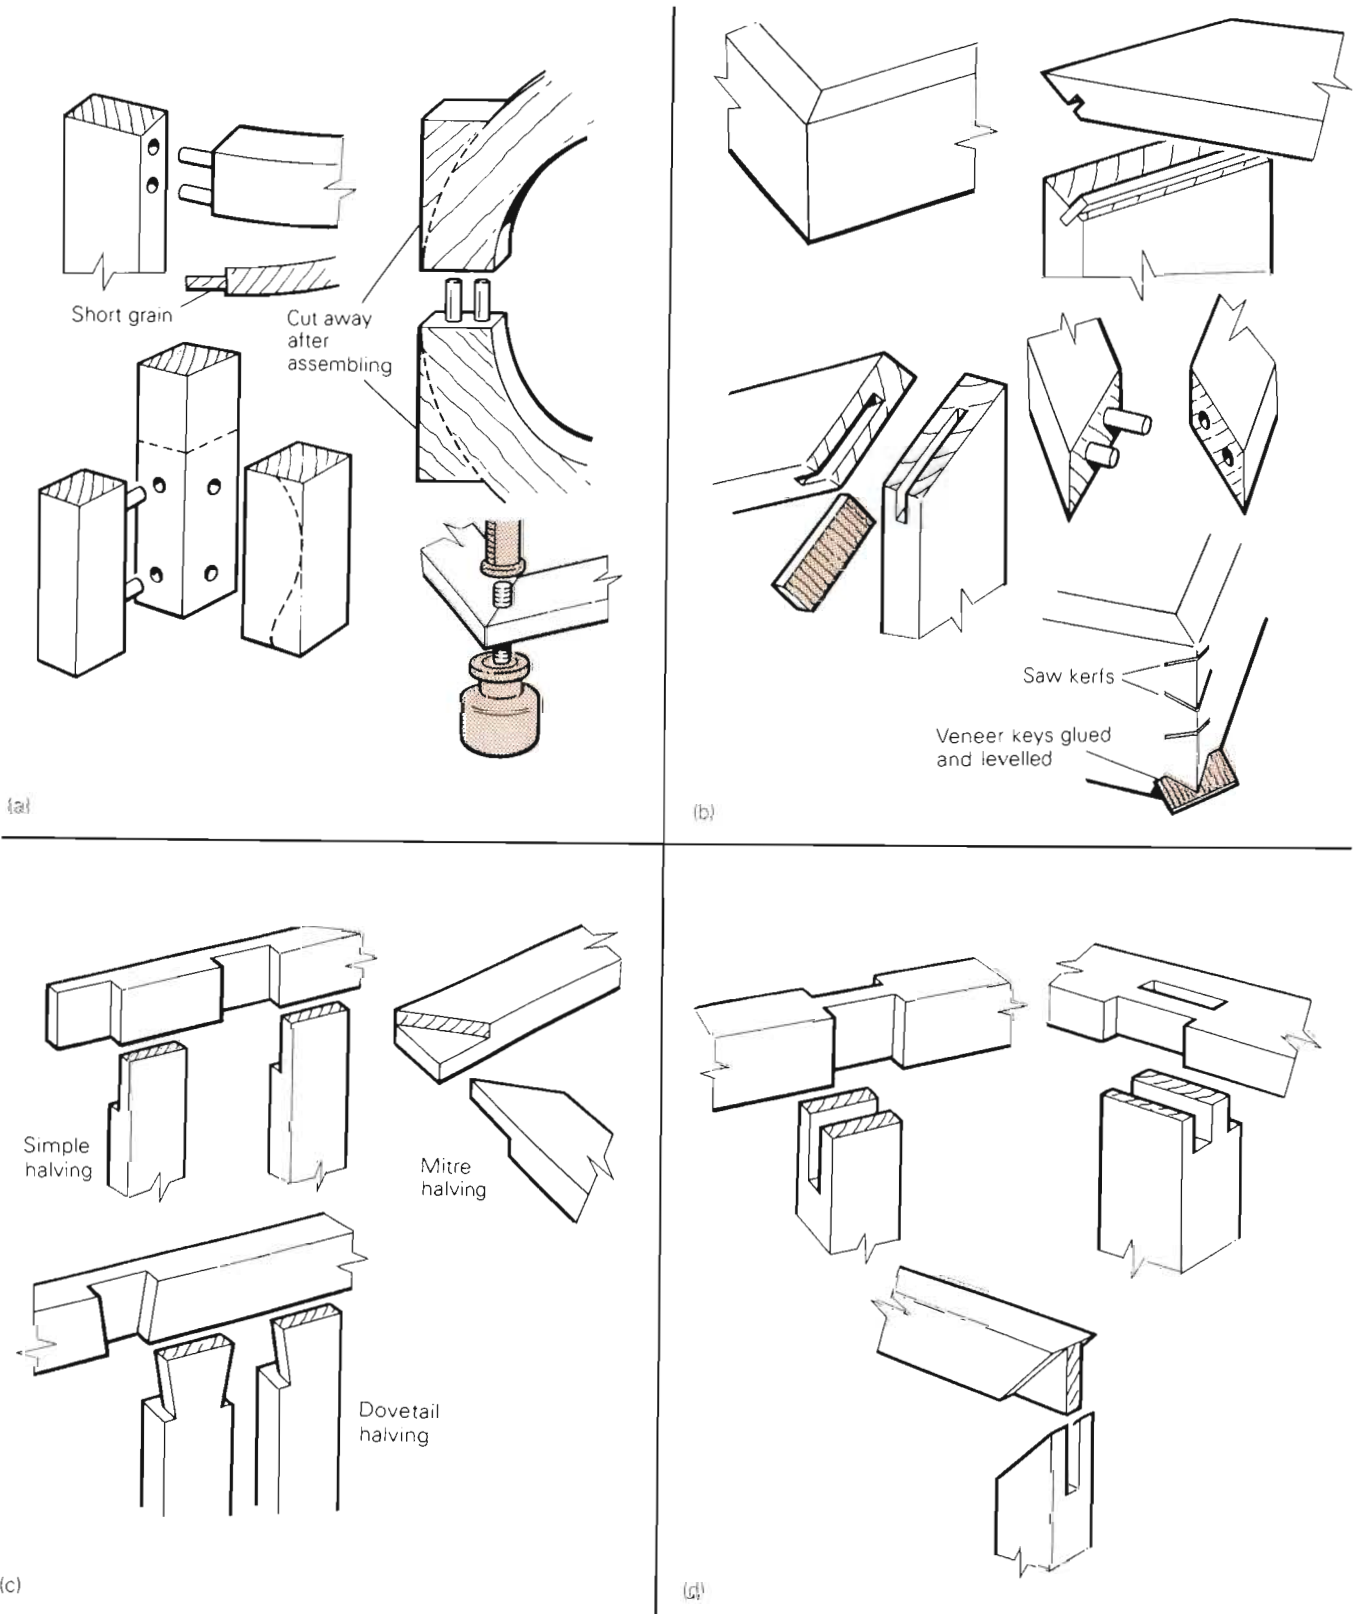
Framing joints: (a) dowelled joints, (b) mitred joints, (c) halving joints, (d) bridled joints.
